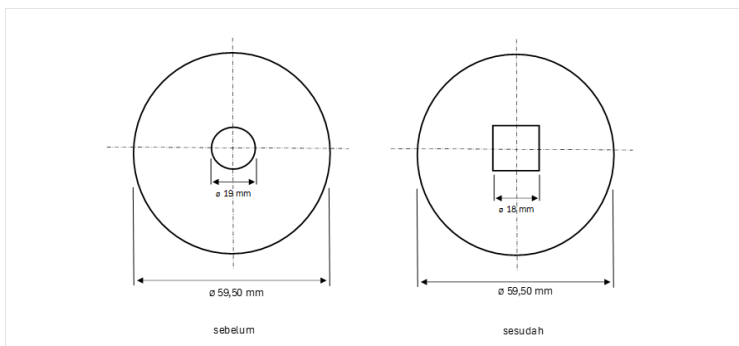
Cross-section of the base of the mold post for the insert shaft mold before and after Pokayoke.
